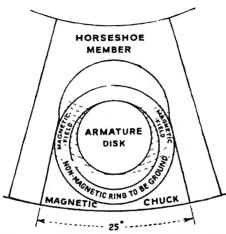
Holding a nonmagnetic ring on a magnetic chuck for grinding.
